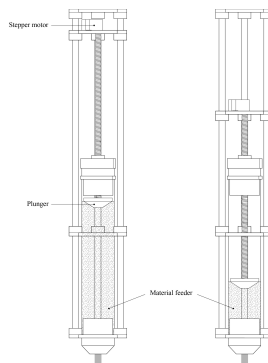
Working principle of the storage-extrusion 3D printing tool head
